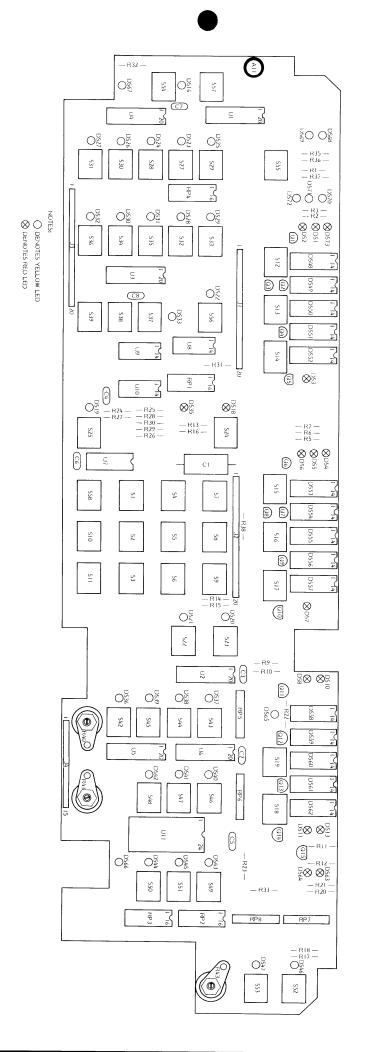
All Front Panel PCB Parts Locator Diagram
